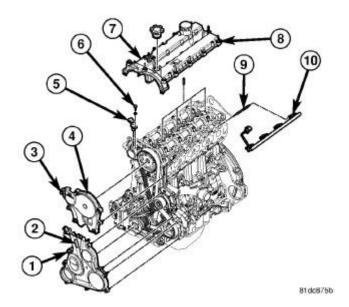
Upper & Lower Outer Timing Belt Covers Courtesy of CHRYSLER LLC
